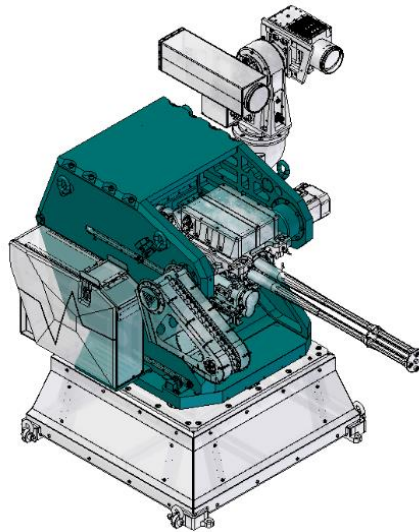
Fire unit top cradle (source: ZM Tarnów)
